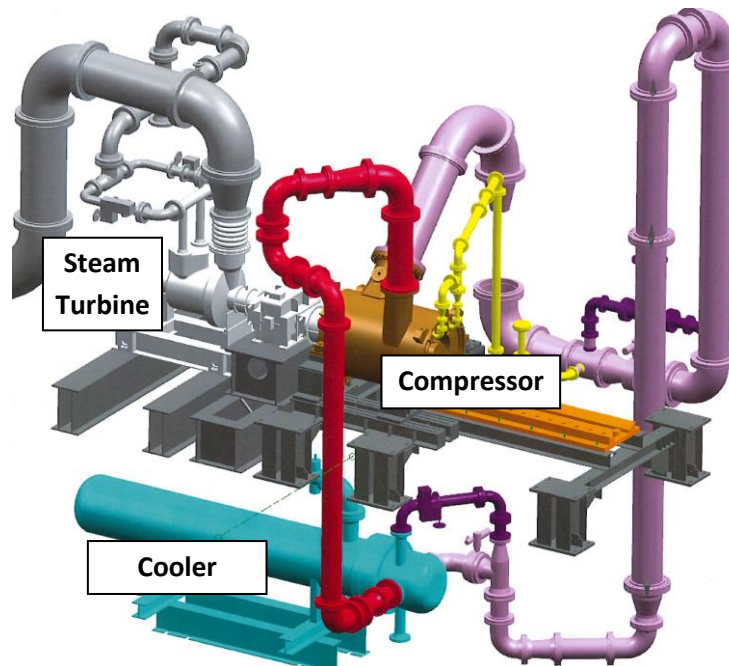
DATUM S LP Compressor (DS-03-01) Test Setup Model
